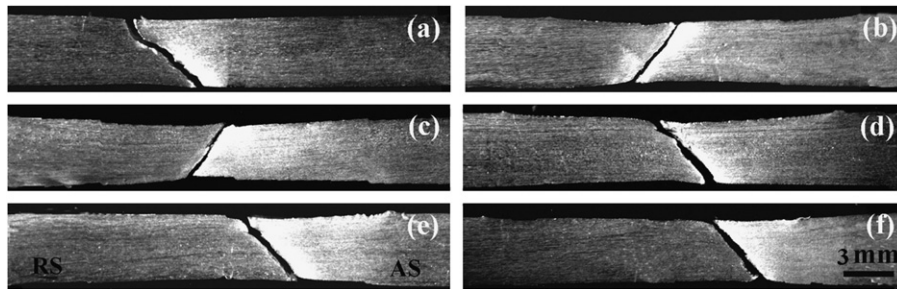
Failed tensile specimens: (a) BM, (b) 400 rpm–100 mm/min, (c) 800 rpm–100 mm/min, (d) 800 rpm–200 mm/min, (e) 800 rpm–400 mm/min, and (f) 1200 rpm–100 mm/min.
